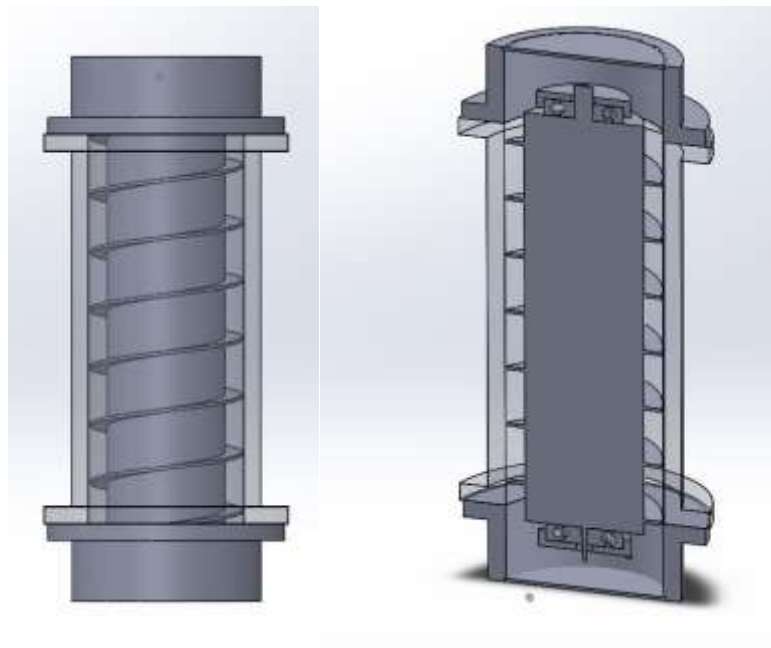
Assembly of underpressure helical turbine roto of pitch 0.17m
